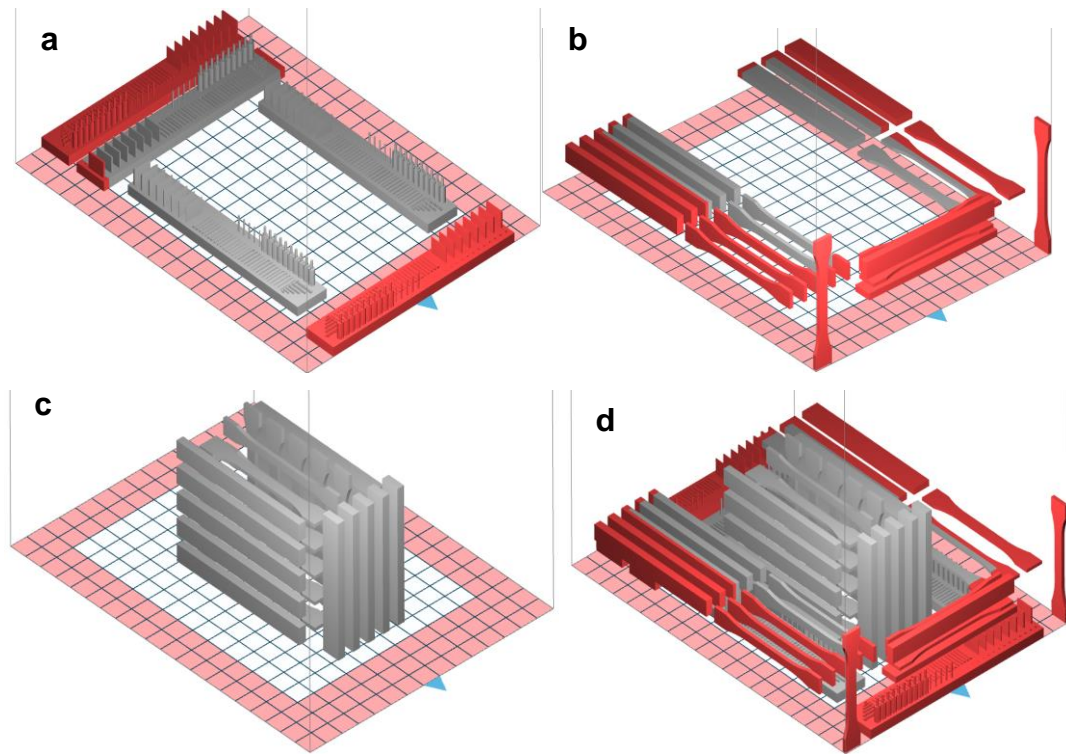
Preview of test sample positioning with (a) tolerance test samples, (b) outer tensile/Charpy-impact test samples, (c) center tensile/Charpy-impact test samples, and total preview (d)
